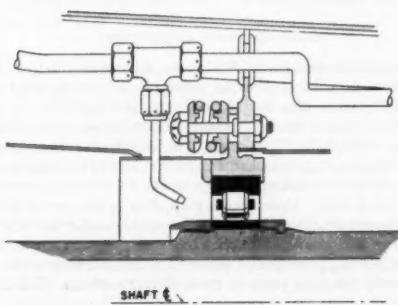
AIRCRAFT GAS-TURBINE BEARING—SOLID-OIL-JET-LUBRICATED
